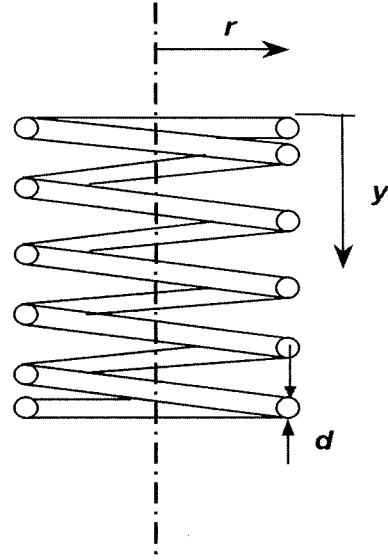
Valve spring of distributed viscous damping and stiffness.
